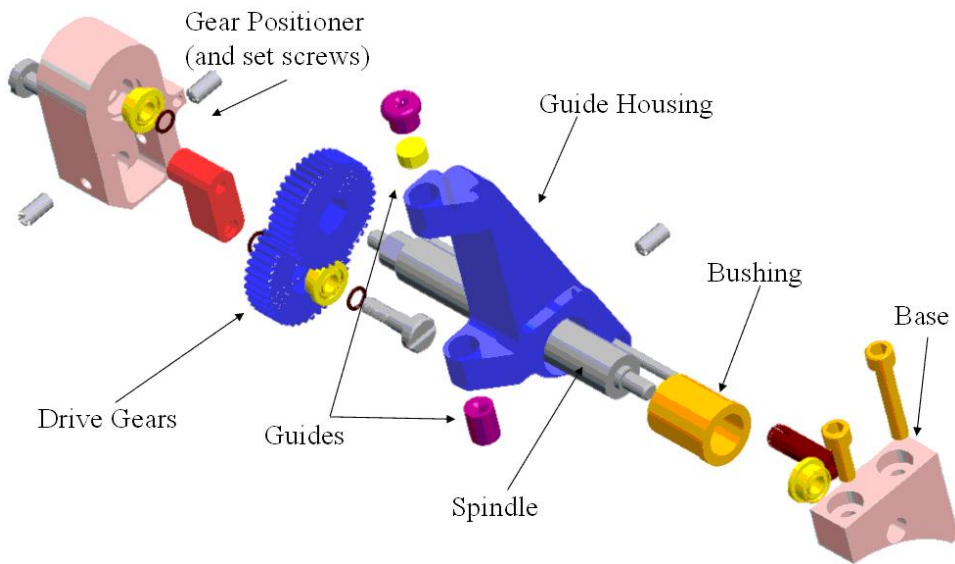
Exploded view of the tether guide, courtesy Payload Systems Incorporated.
